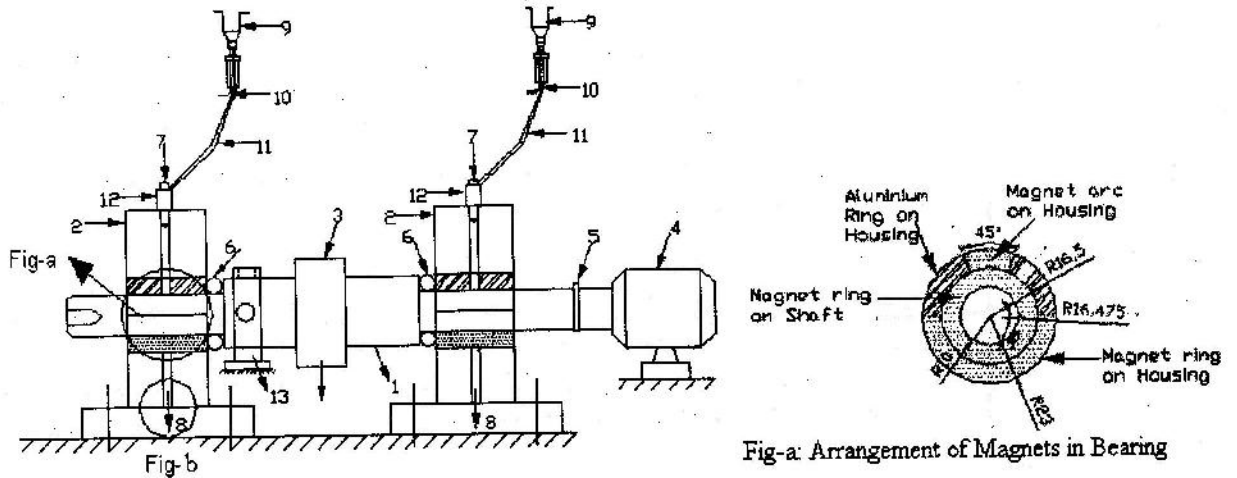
SCHEMATIC DIAGRAM OF EXPERIMENTAL SETUP OF HYBRID BEARING.
